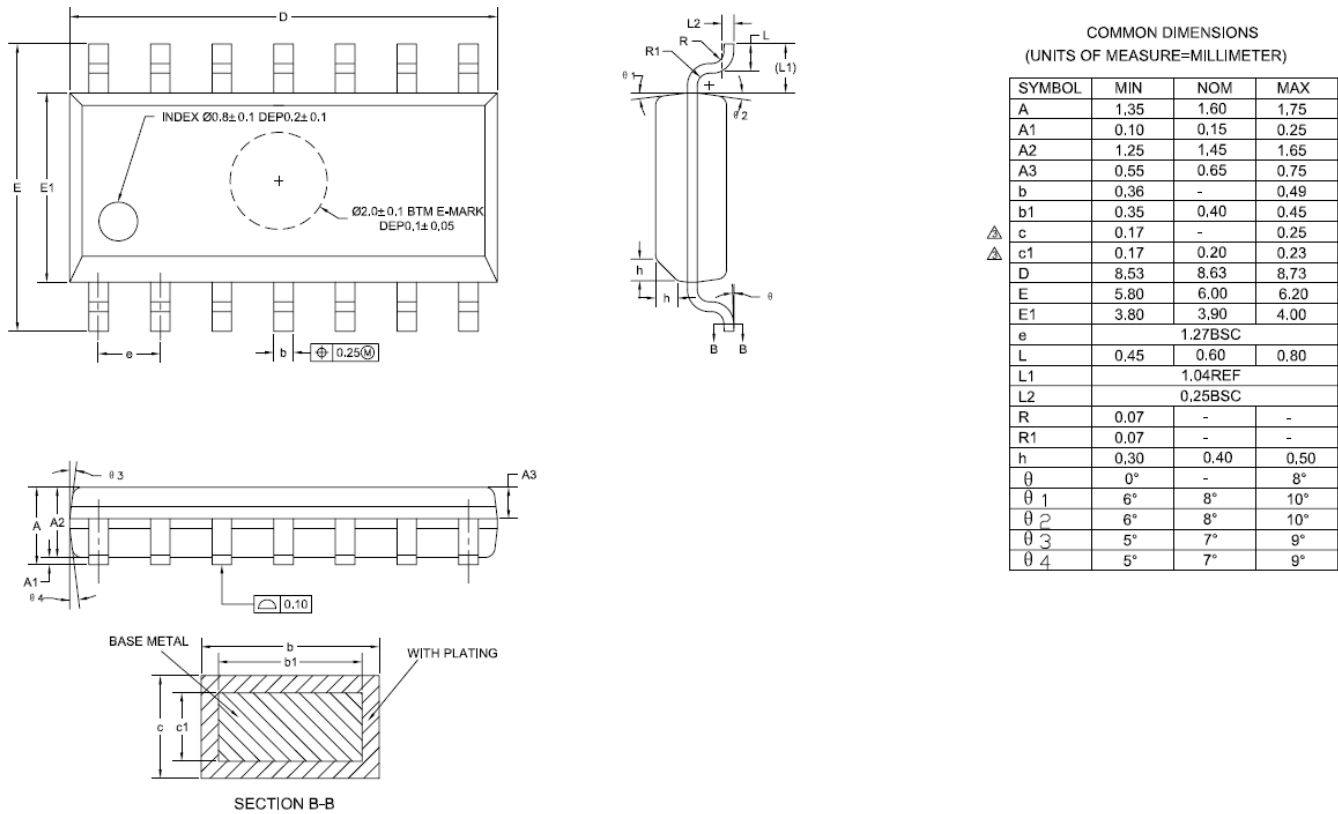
SOP14 Package Shape and Dimension in millimeters
